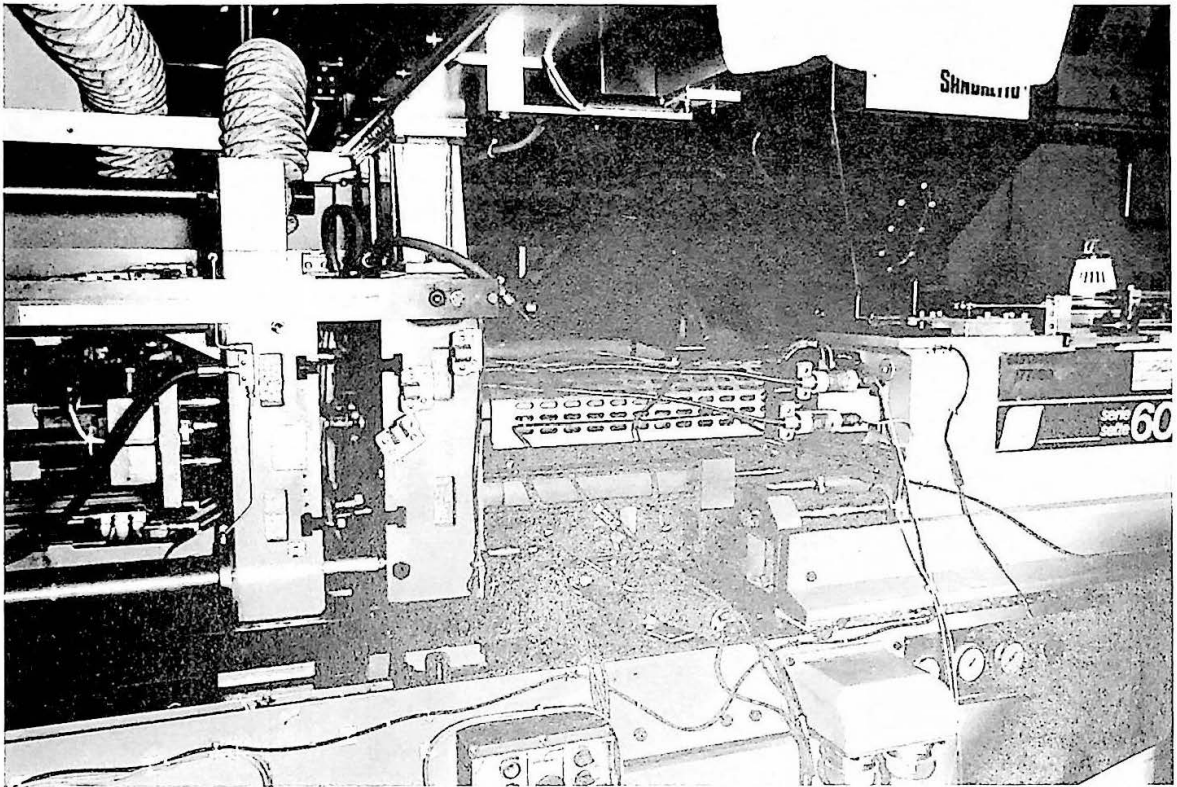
General view of Sandretto 60 tonne injection moulding machine configured for in-line capillary rheometry
